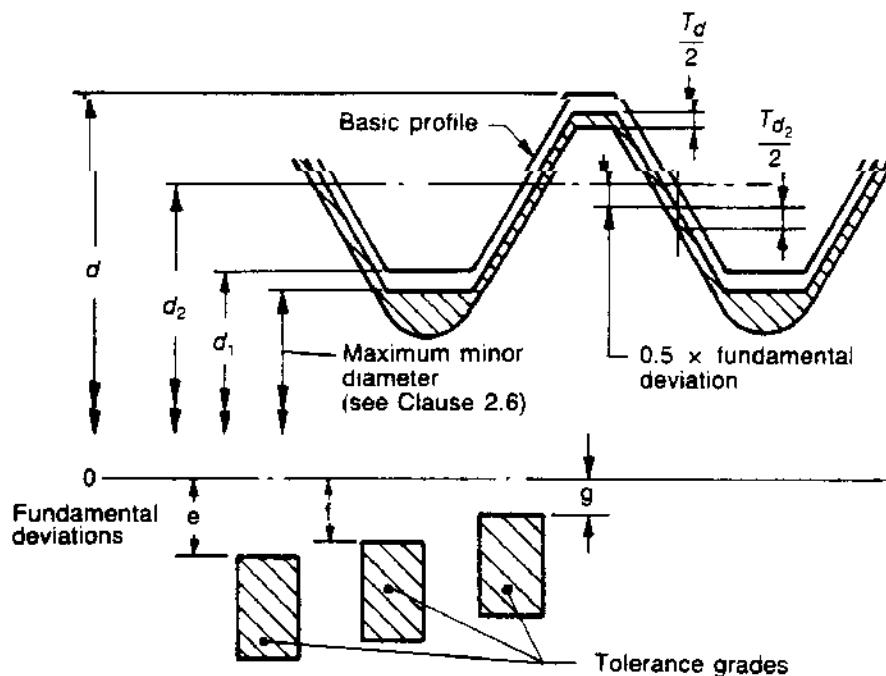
LIMITING PROFILES FOR EXTERNAL THREADS — TOLERANCE POSITIONS e , f , AND g
